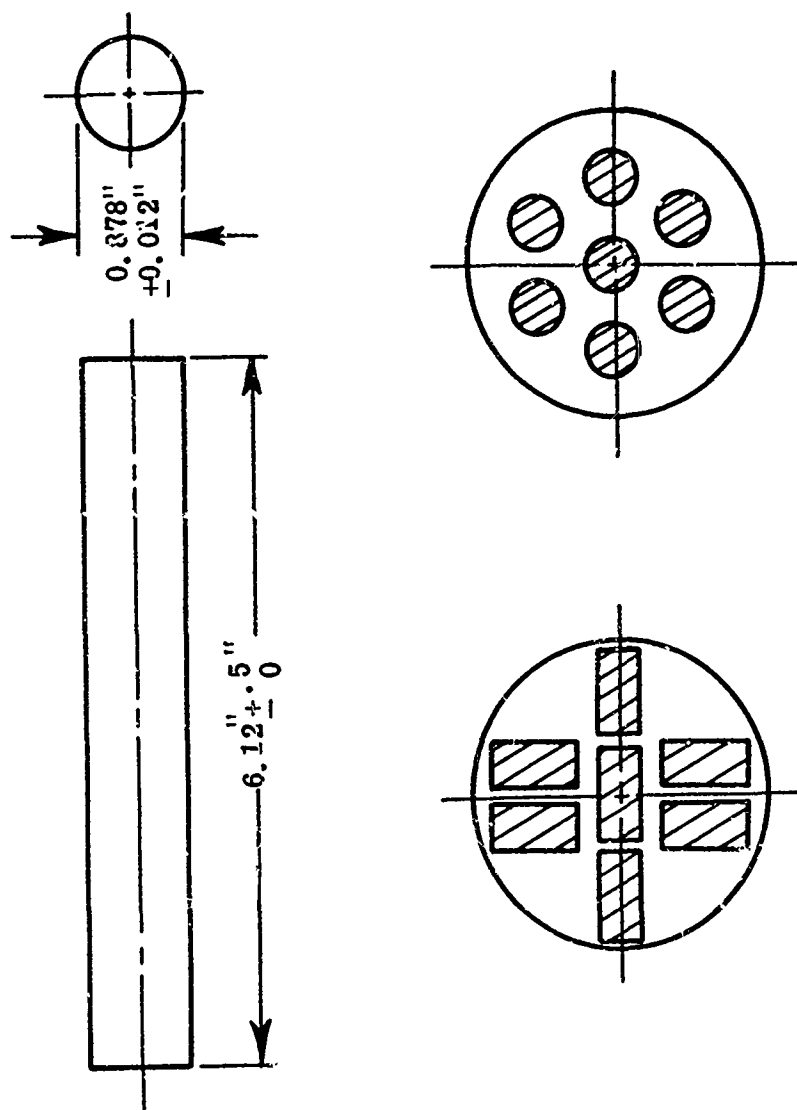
Configuration of Specimen Blank 1831-A-12 as received from Coors and Cutting Plan for Removing Phase I Macro Tensile and Macro Flexural Specimens
